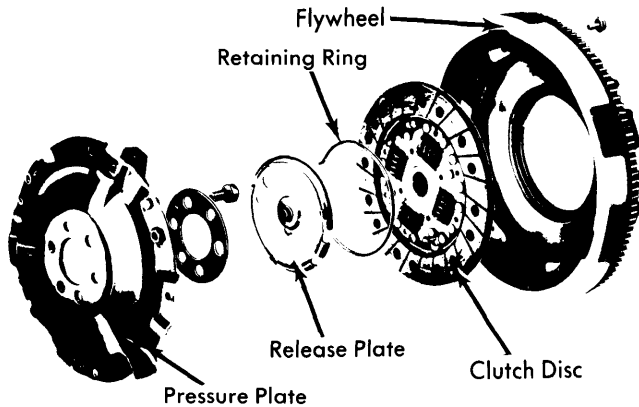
Exploded View of Clutch and Flywheel Assembly
